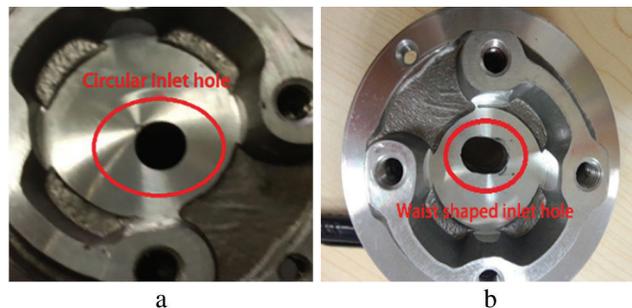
Improvement of the inlet hole of the static scroll disk. a) Circular inlet hole. b) Waist-shaped inlet hole
